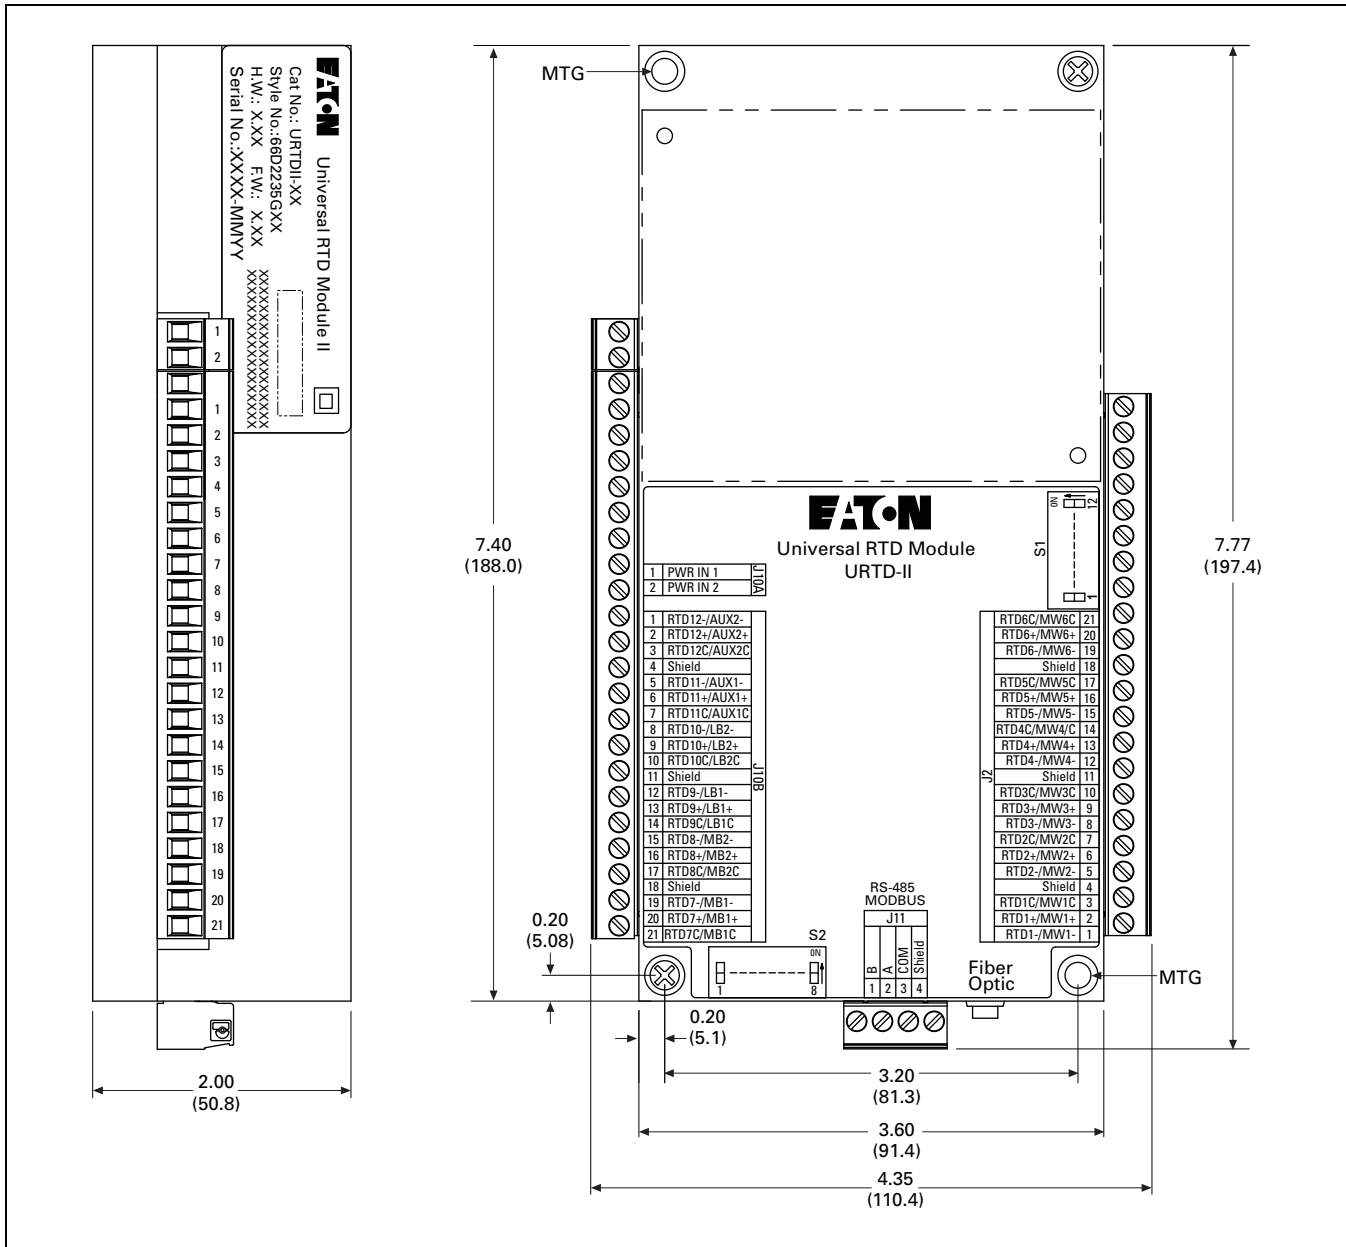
MP-3000 URTD Mounting—Dimensions in Inches (mm)
